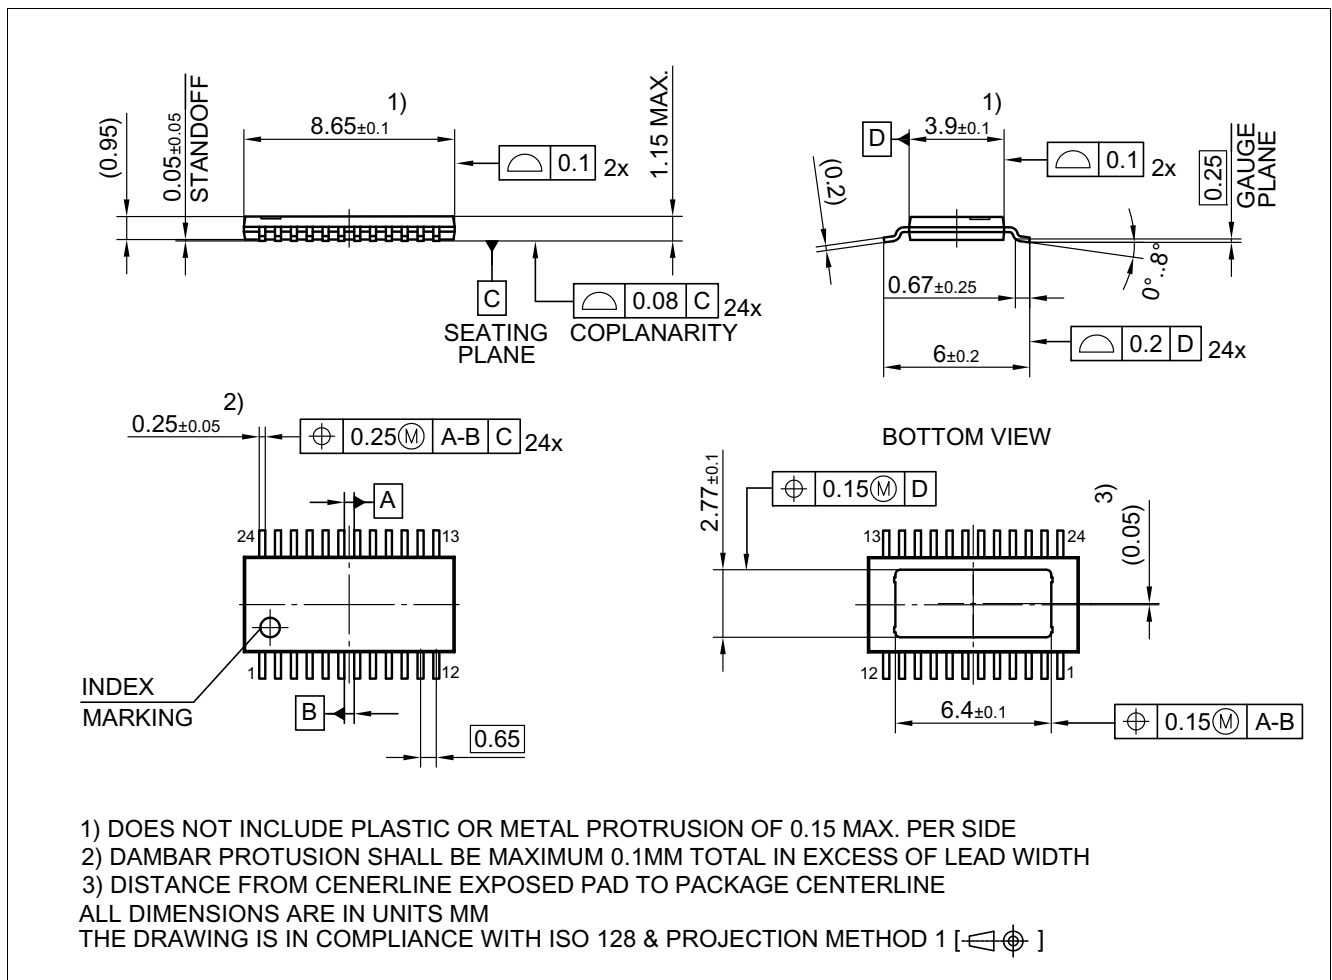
PG-TSDSO-24 (Thin (Slim) Dual Small Outline 24 pins) Package drawing
